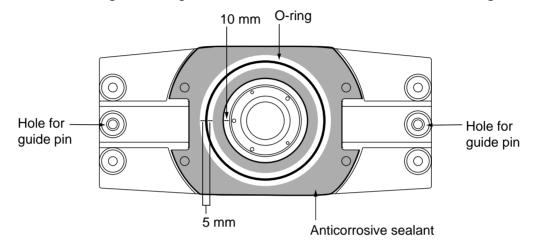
Coating the waveguide flange with anticorrosive sealant
